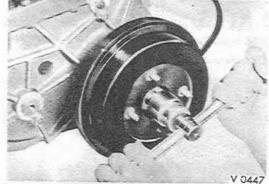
Removing the center brake drum from the transfer drive shaft.
